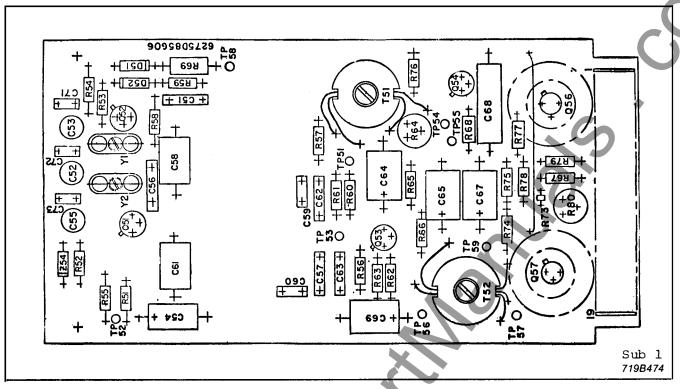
Component Locations on the Transmitter Printed Circuit Board. Style 6275D85G06
